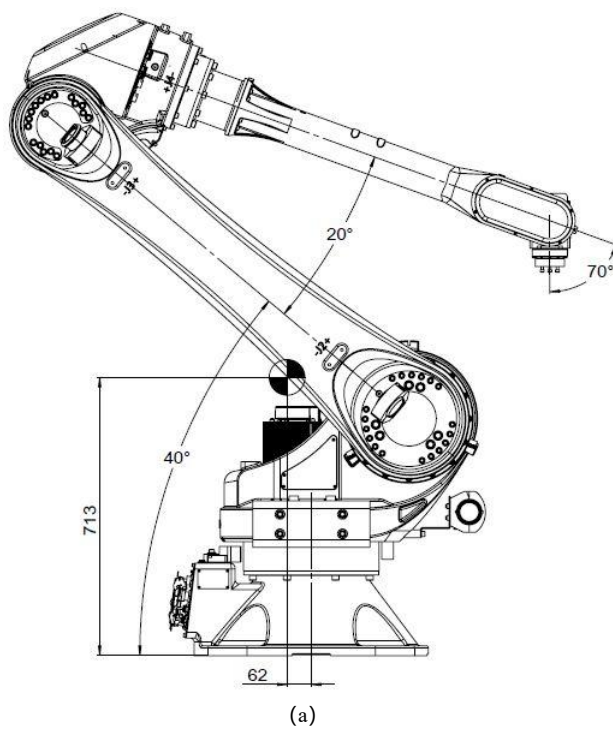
Operating dimensions of the RX3-A680-2560 handling machine
